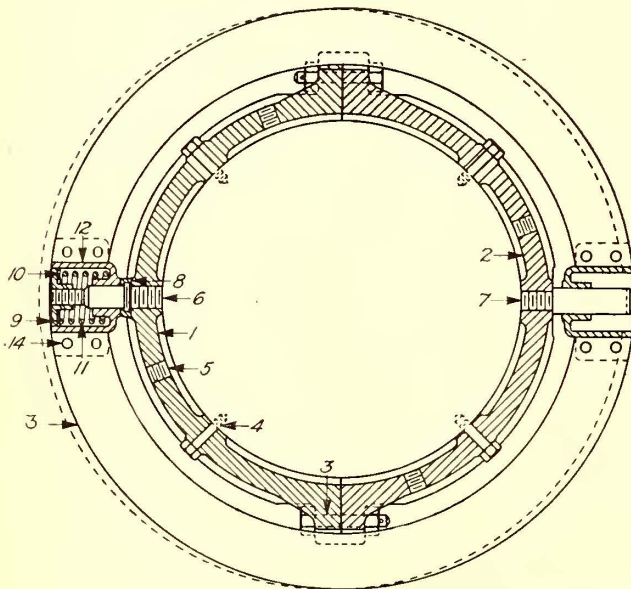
SECTION OF ECCENTRIC RING FORMING PART OF SPEED LIMIT DEVICE
